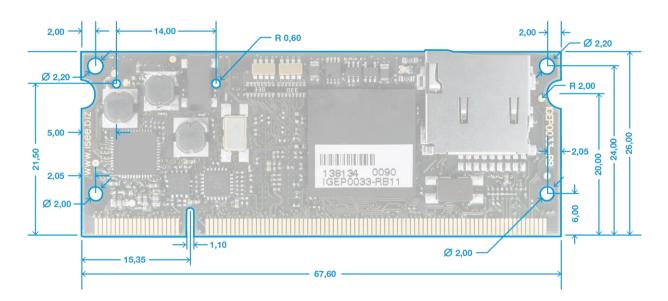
IGEP<sup>™</sup> COM AQUILA AM335x TOP side view detailed mechanical
